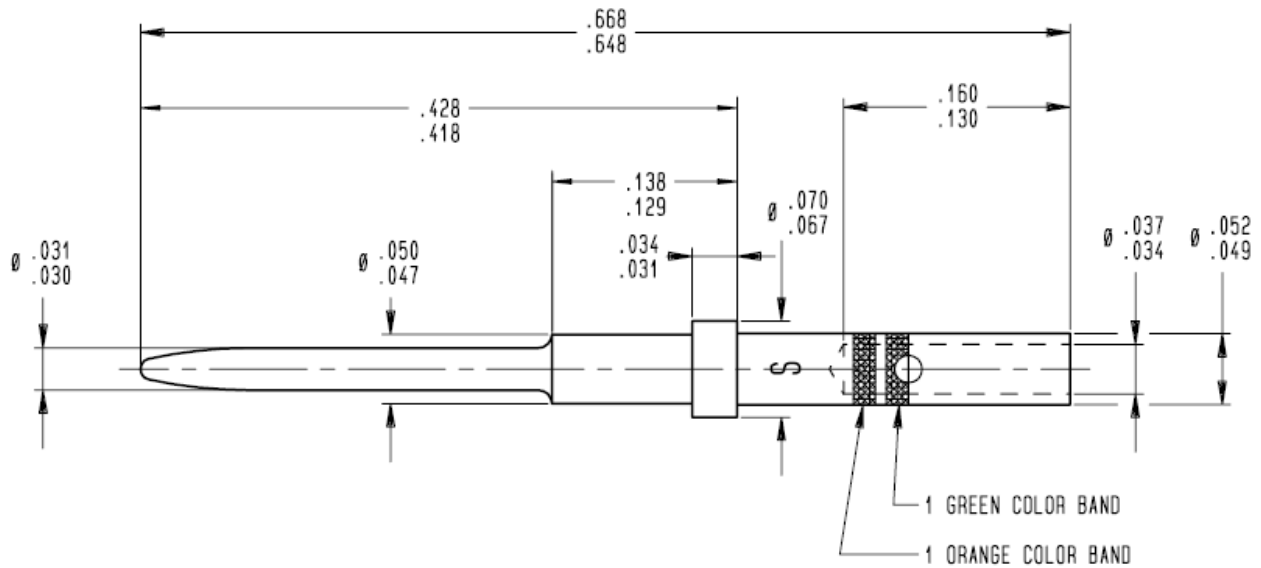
Size 22 Crimp Removable Pin Contact (In Inches)
